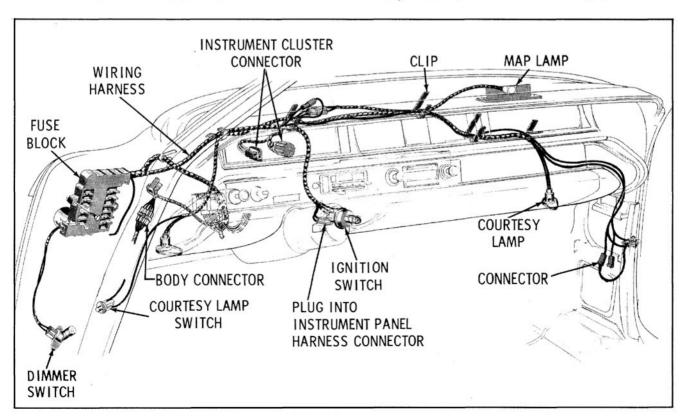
Instrument Panel Wiring (33-34-35-36-38 & 39 Series)
